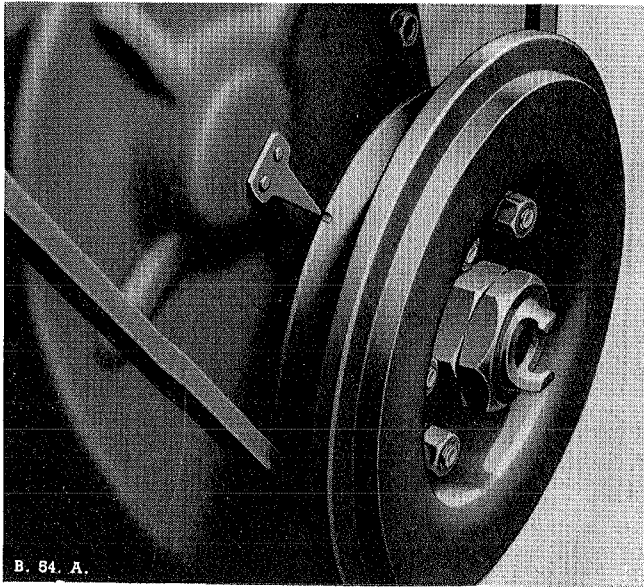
Showing the timing pointer set opposite to the notch in the crankshaft pulley. (Number 1 piston at T.D.C.)
